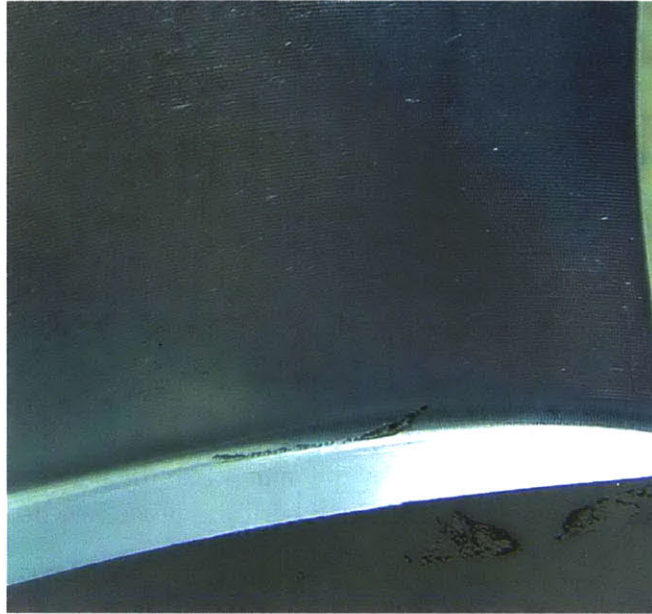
Inadequate weld joints in fillet because of control issues with the electron beam
